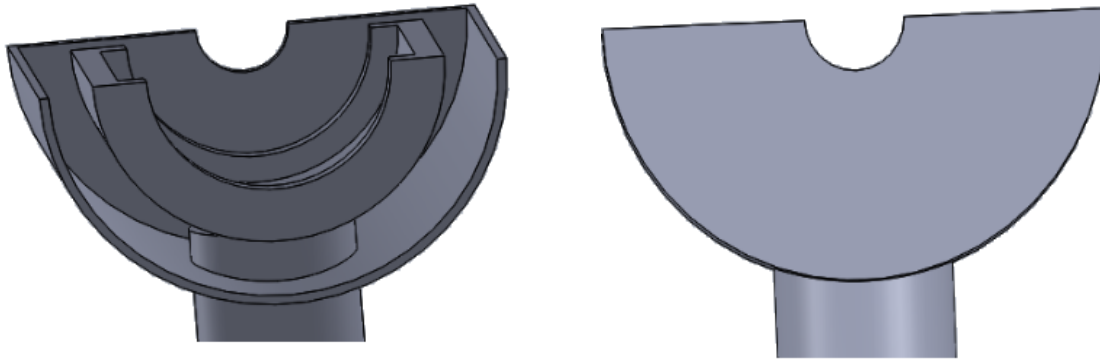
CAD drawing of the second design of bearing housing and oil tank
